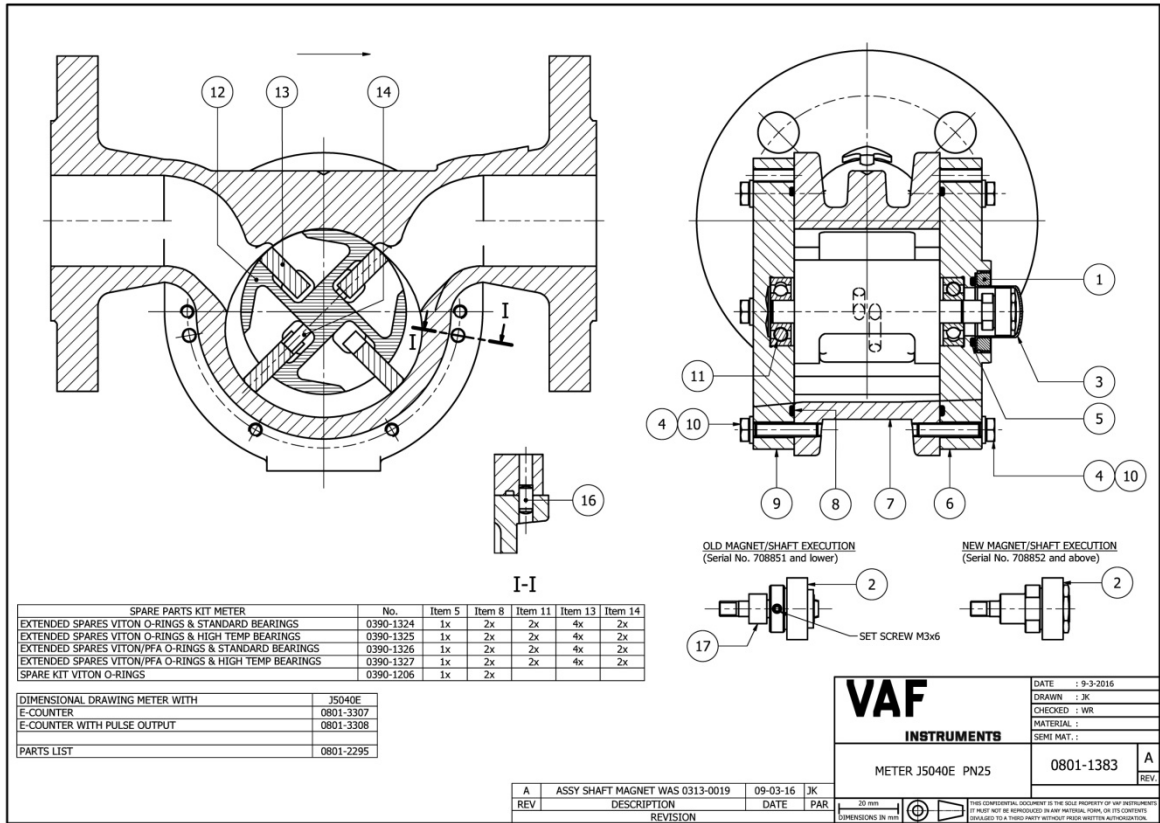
Drawing 0801-1383 – Meter J5040E PN25
